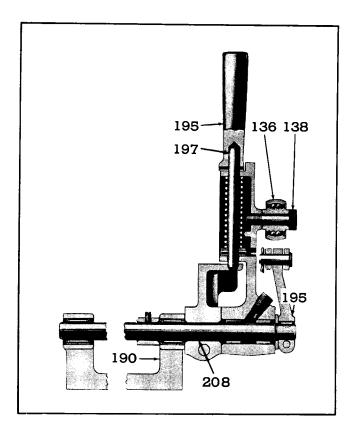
Individual Throttle Assembly on a Tandem Twin Unit
